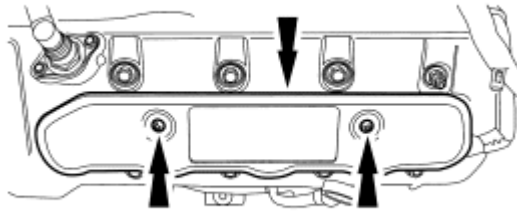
Detaching Wiring Harness Retainers From LH Valve Cover Stud Bolts
